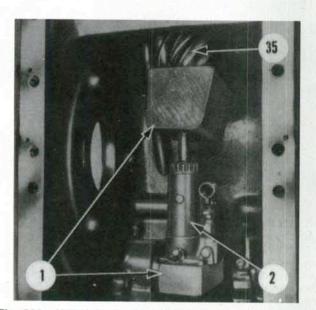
Hold bevel pinion (35) in place with hydraulic jack (2) and wood blocks (1) as shown when installing front bearing cone.
